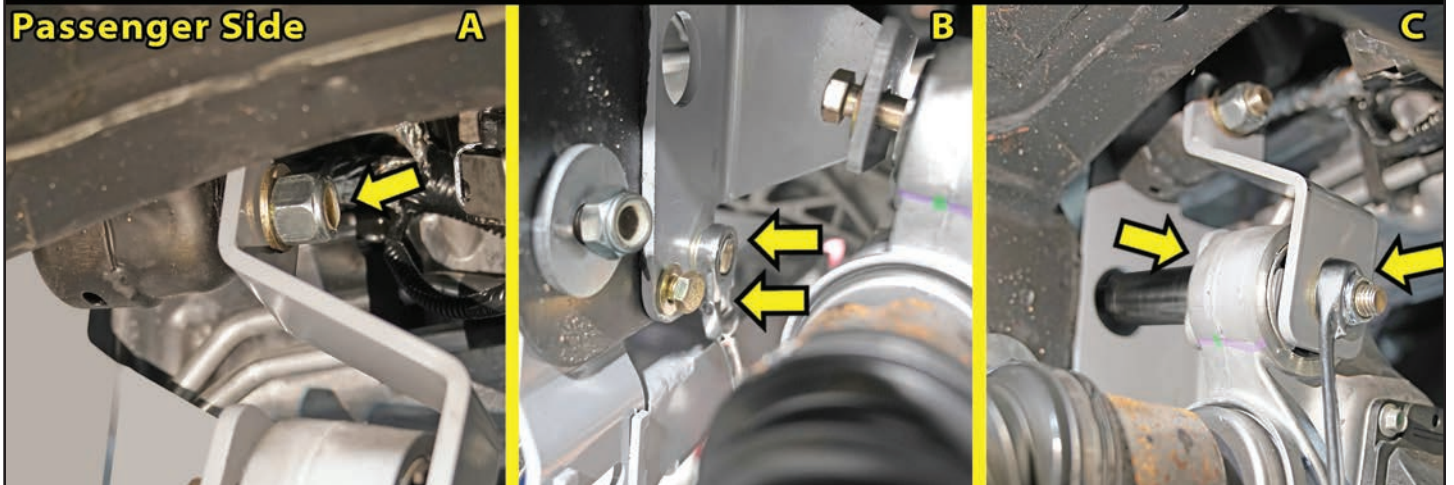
Install Front Crossmember...Passenger SideDriver Side20. TIGHTEN PA SIDE FRONT DIFFERENTIAL BRACKETS...
